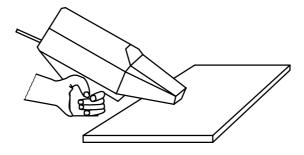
Hand-held laser assembly (laser device as an integral part of the hand-held device), manually positioned, with or without motorized feed, workpiece fixed
